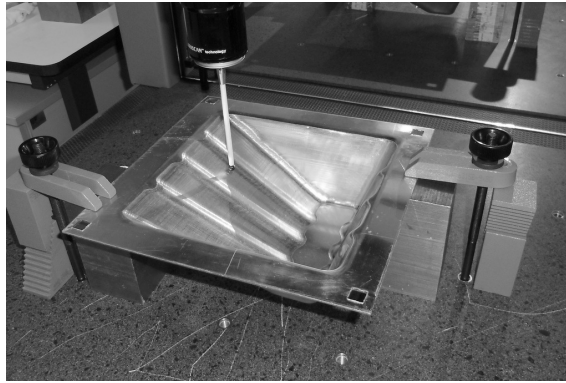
Hand layup sheet metal mould dimensional measurement
